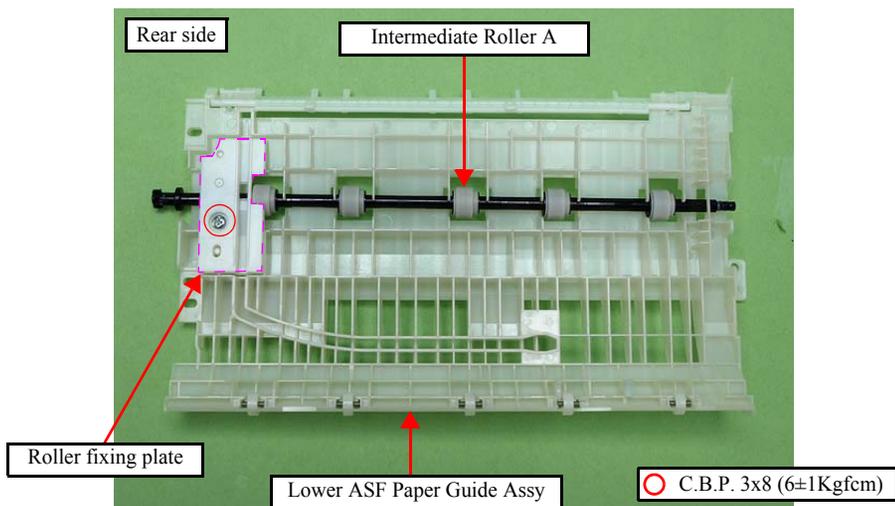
Removing the Lower ASF Paper Guide Assy (3)
